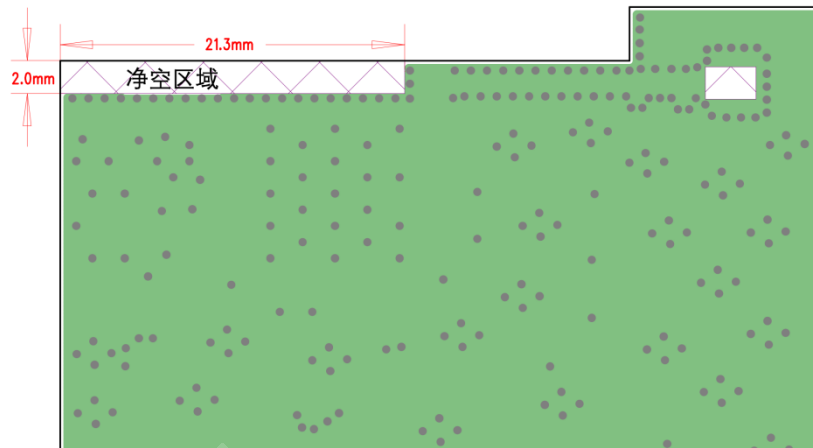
Module Layout - Main Board L2/L3/Ln...../BOTTOM Layers
